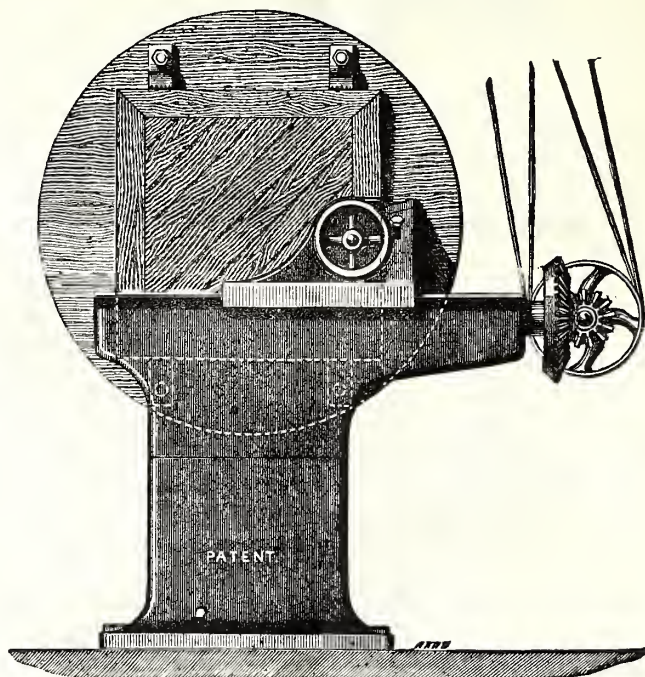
WORSSAM AND CO'S PARQUETRY MACHINE.
